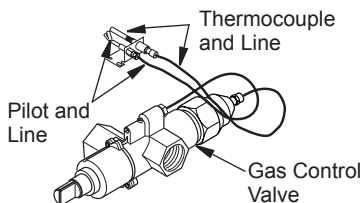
Gas Control Valve with Thermocouple and Pilot
